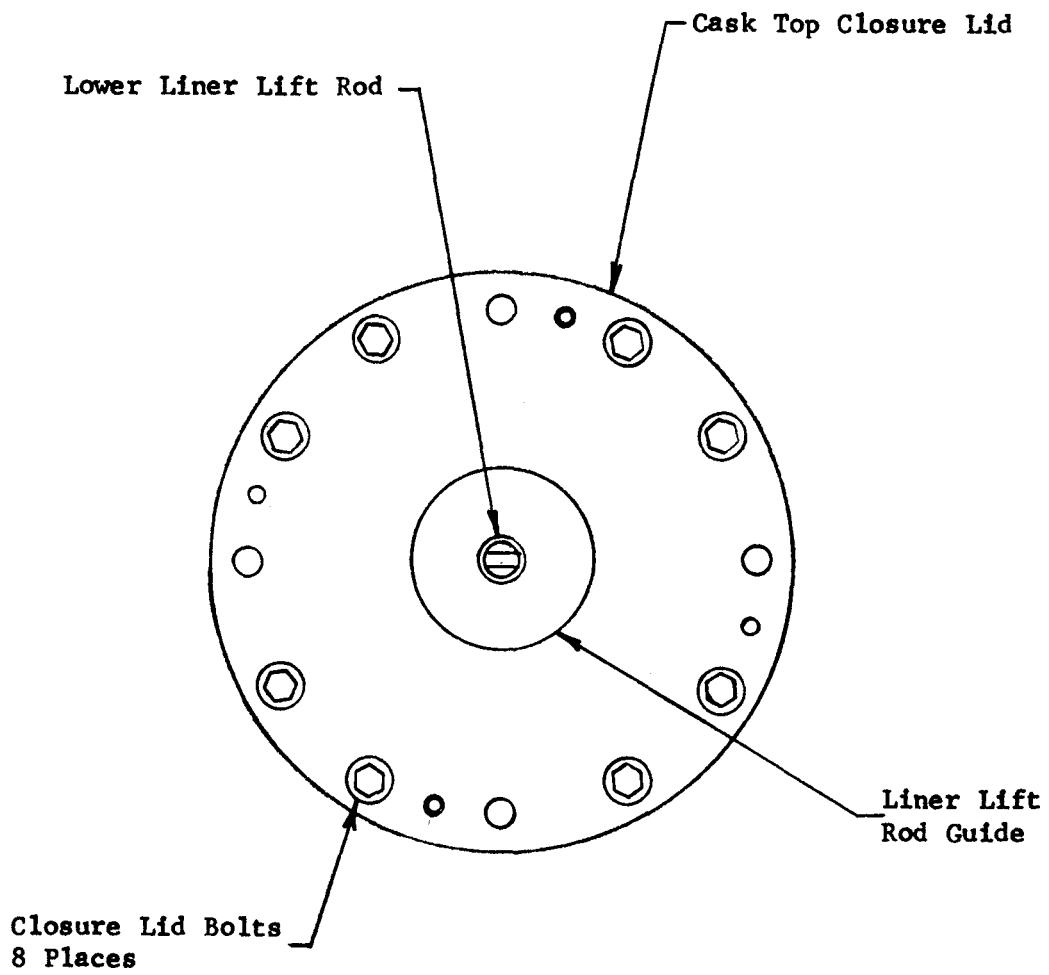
LWBR Storage Liner Lift Rod Guide
